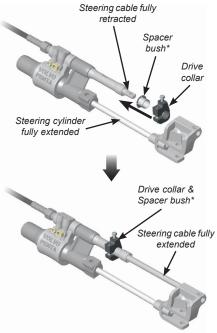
Fitting the drive collar and bush to the steering cable sleeve
